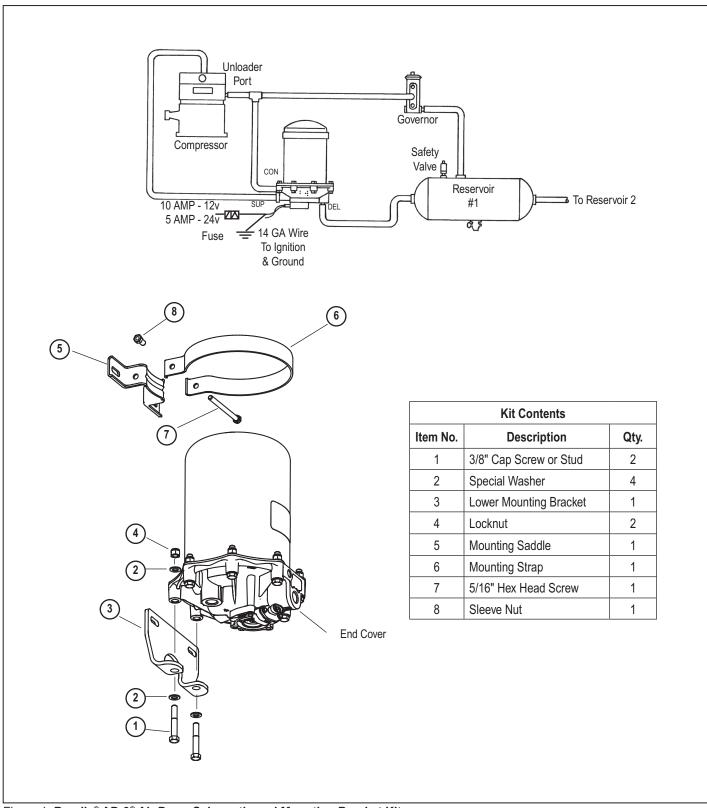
Bendix® AD-9® Air Dryer Schematic and Mounting Bracket Kit
